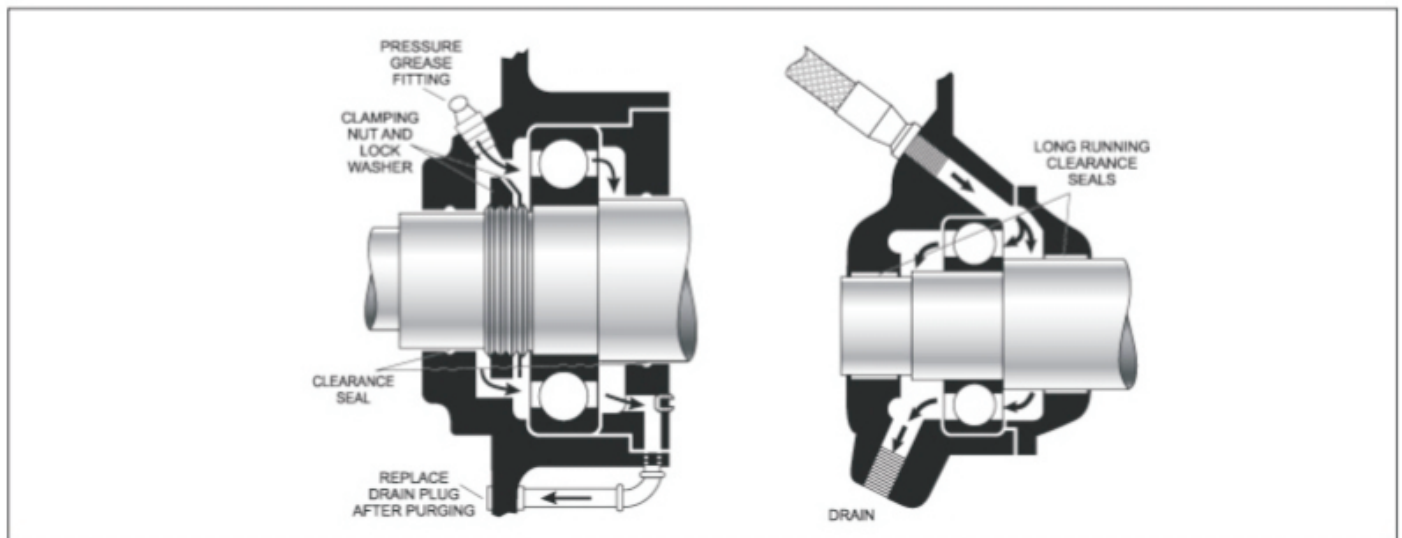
Free-purging housing designs. The design on the right, sometimes referred to as a transverse greasing design, may be preferable to that shown at left because the drain passage is shorter and larger.
